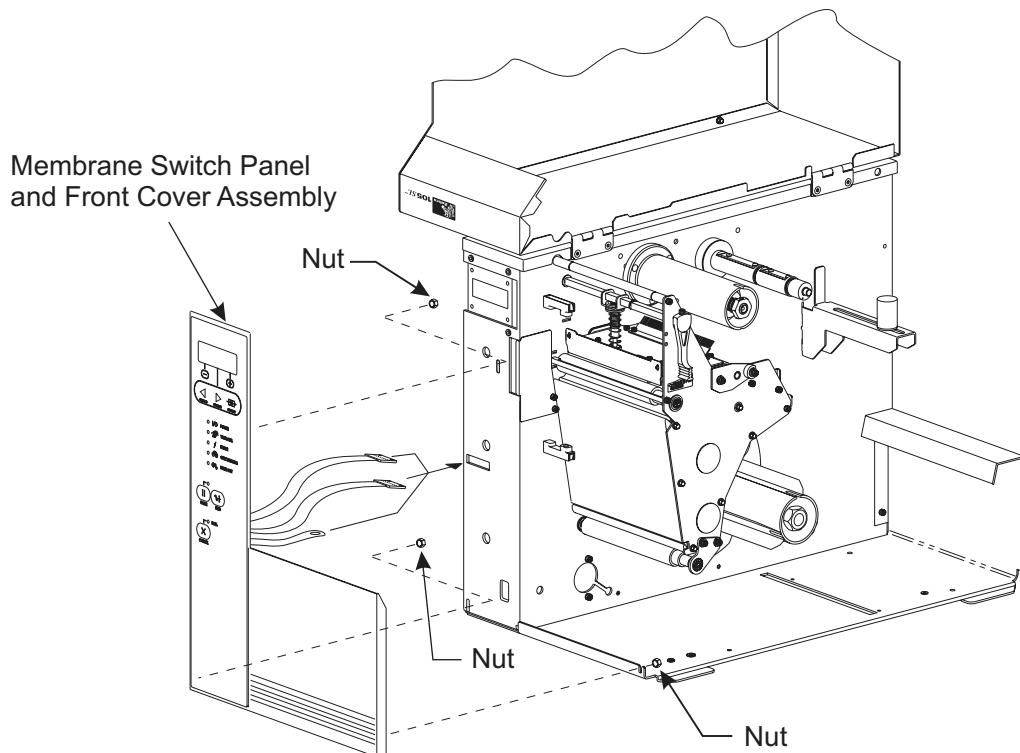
Remove/Install Membrane Switch and Front Panel Assembly
